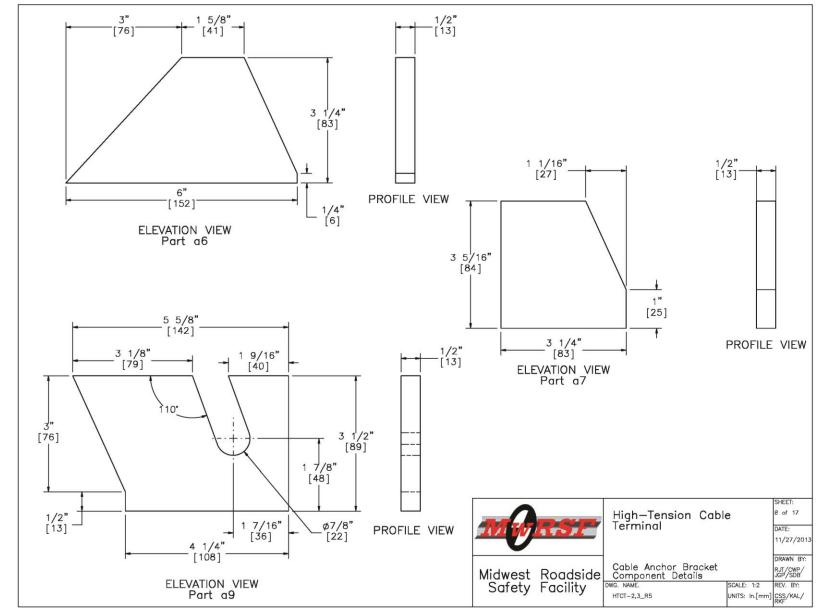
Cable Anchor Bracket Component Details, Test Nos. HTCT-2 and HTCT-3
